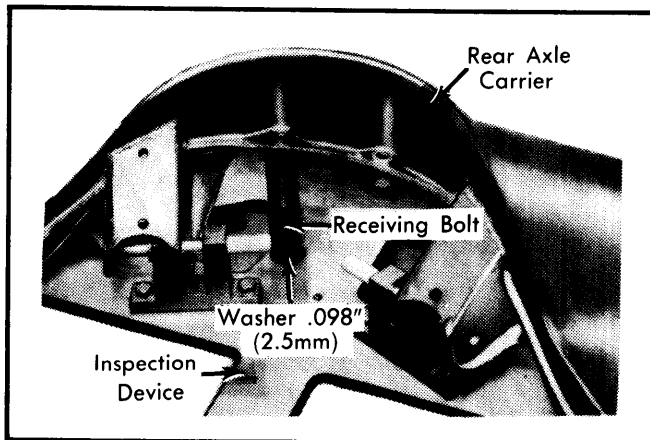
Proper Washer Placement for Rear Axle Carriers without Spot Welds
